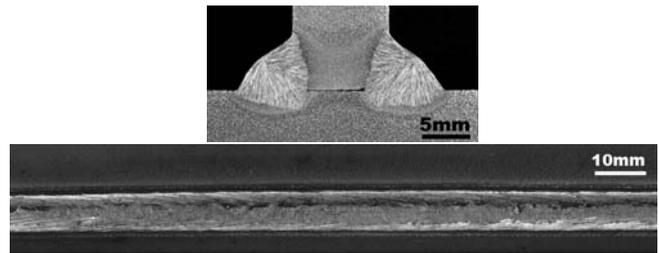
Typical bead appearance and macrostructure of MX-200H (1.6 mmØ) fillet weld made by the TOP process on a primer coated steel plate (CO₂ shielding; inorganic zinc primer of approx. 20 µm thick.; travel speed of 150 cm/min.)
